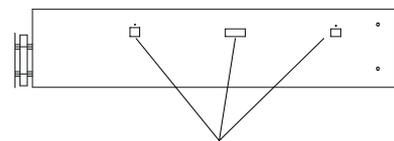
Electrical drawer Cut-outs for hooking in the telescoping units
